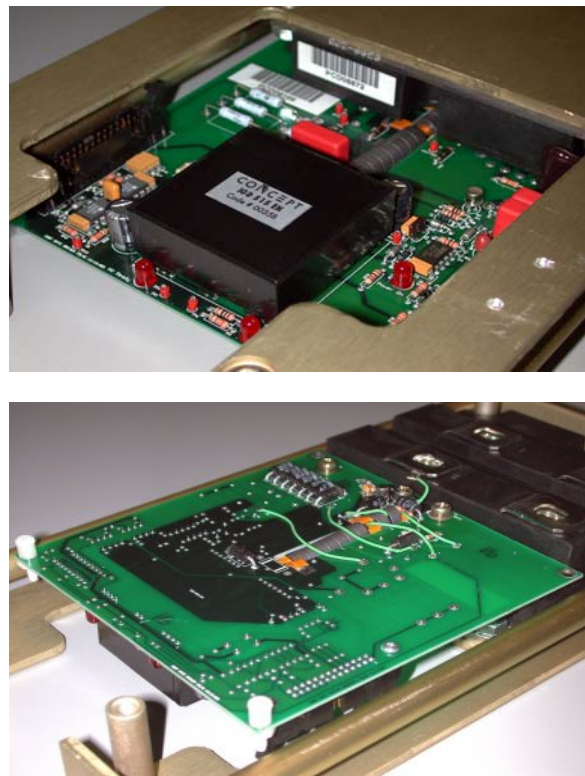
Gate driver board mounted on IGBT module and the heat sink.
